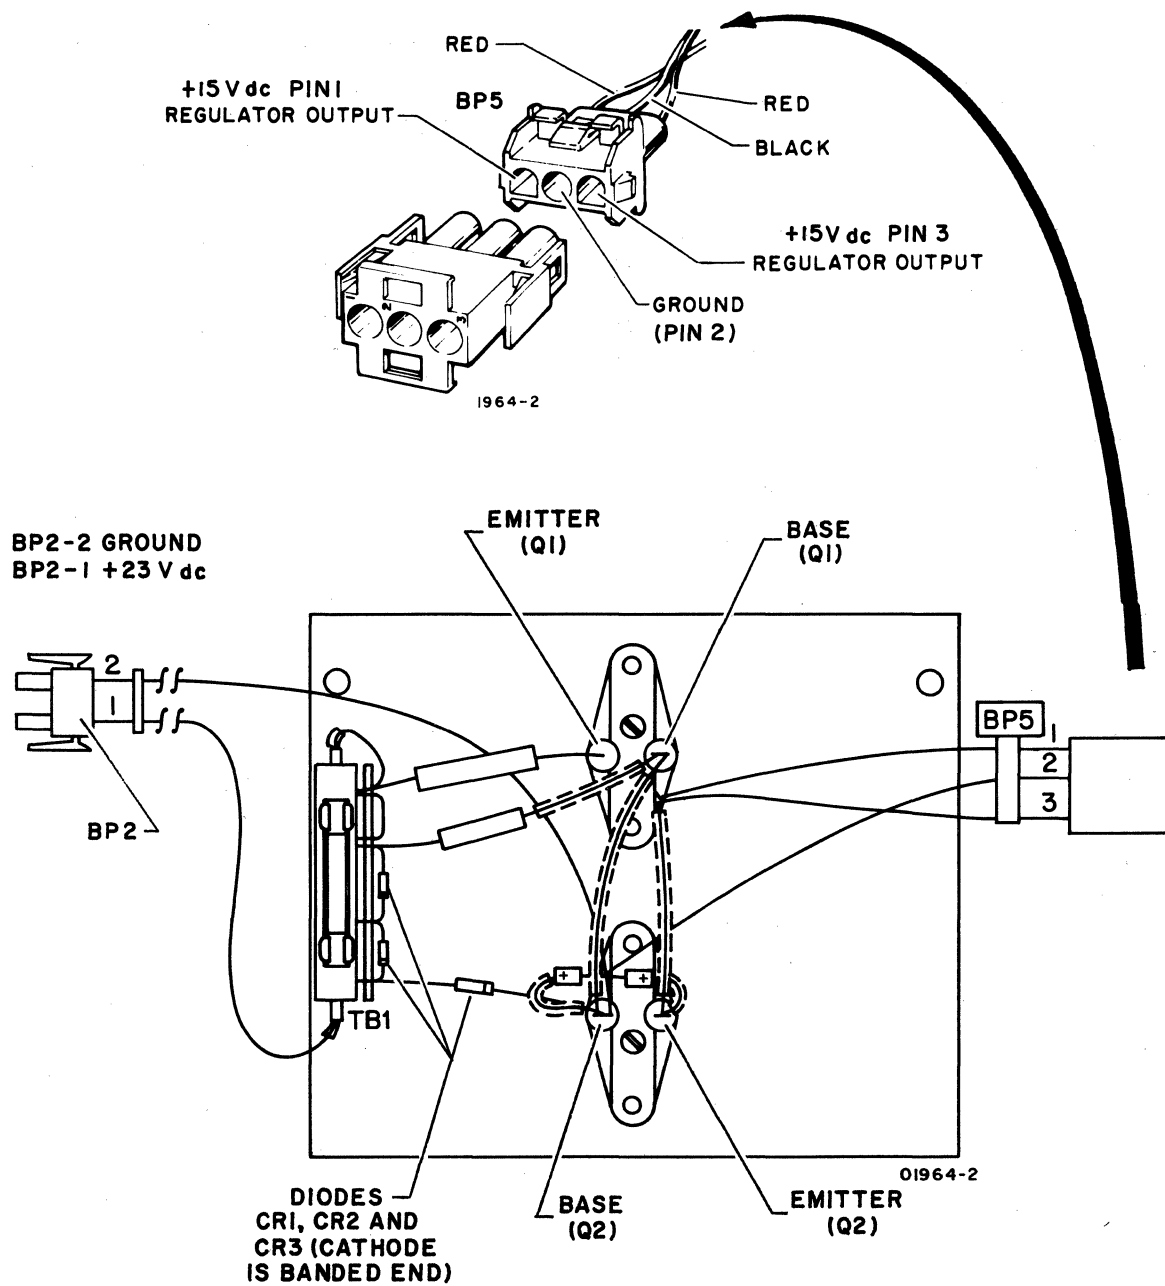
+15-V dc Regulator Assembly Detail (Rear View)
